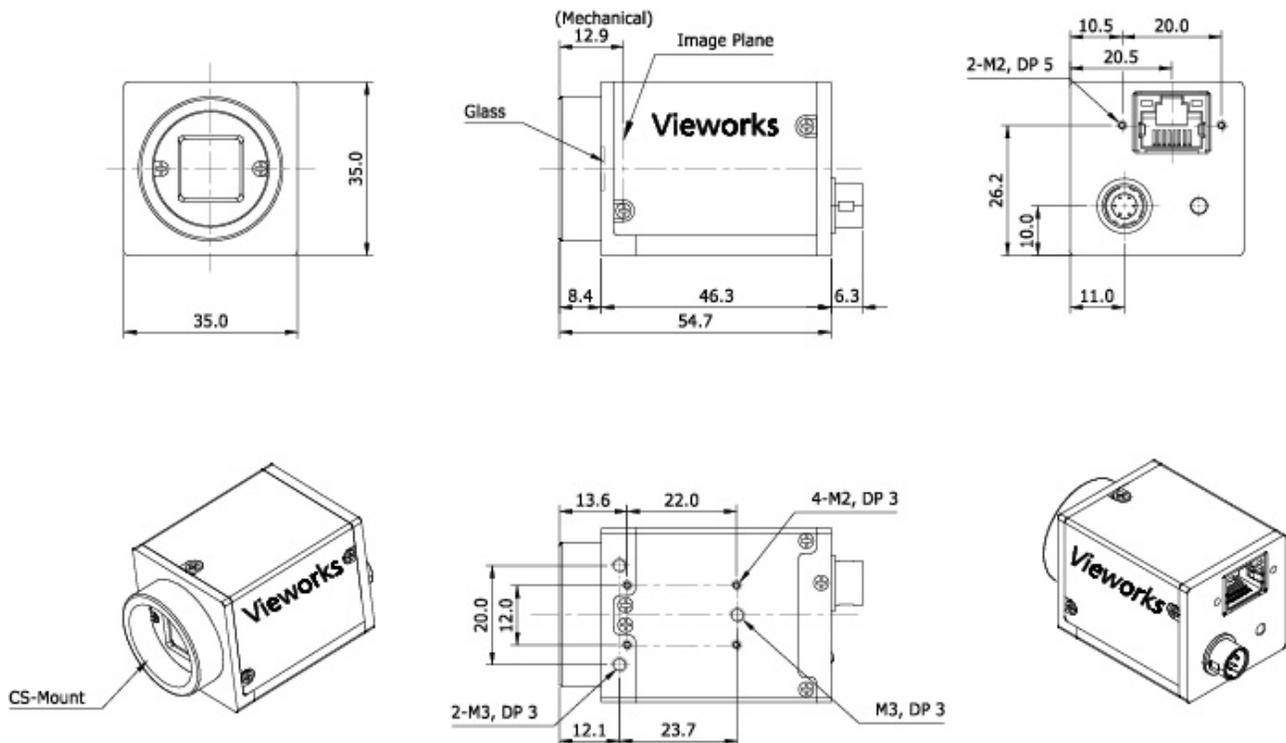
VQ-5MG-16 CS-mount Mechanical Dimension
